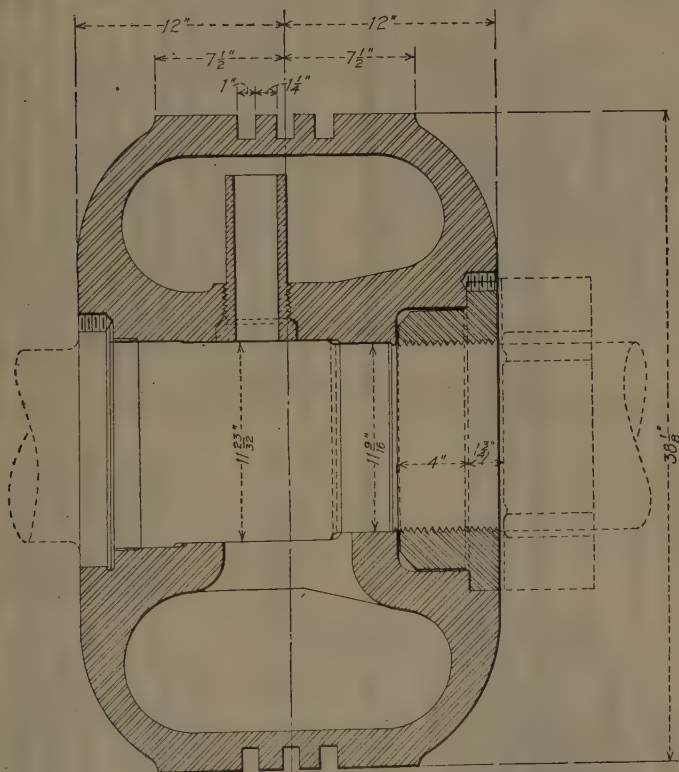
FINAL FORM OF 38-IN. STEEL PISTON
